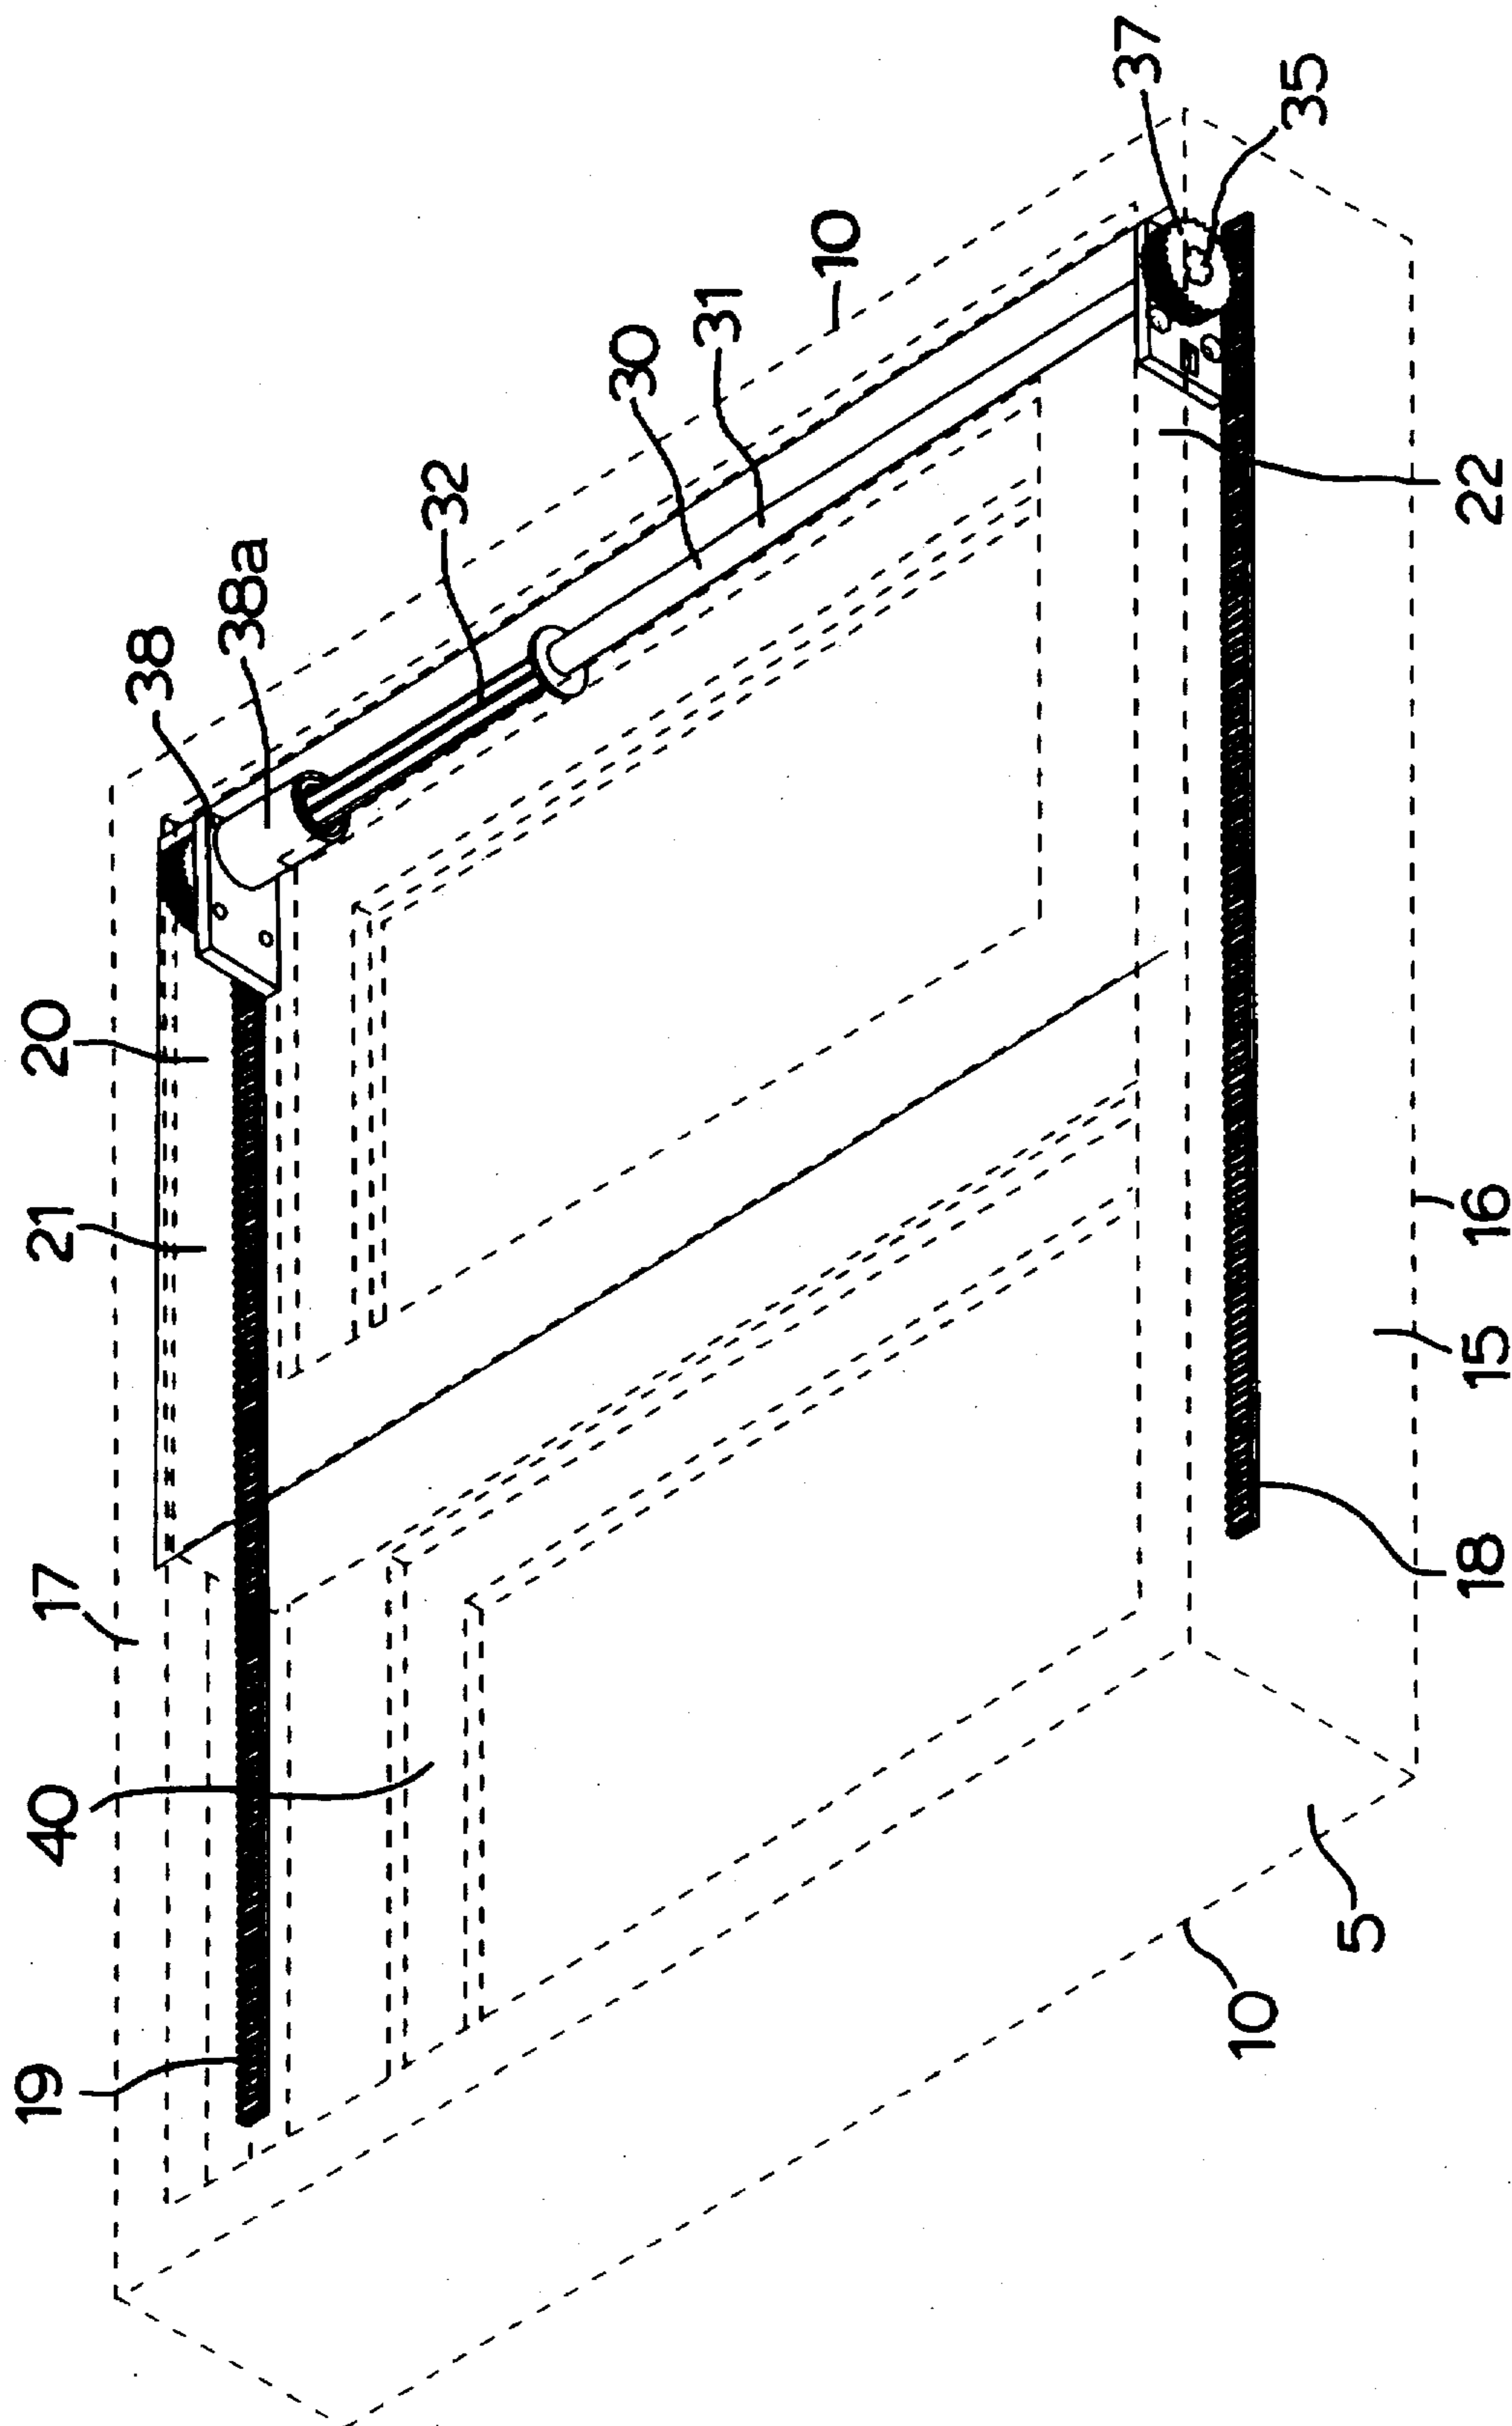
is a perspective view of a mechanical assembly 10. The assembly includes a base 5 and a top plate 19. A central shaft 30 is supported by bearings 31 and 32. A handle 20 is attached to the shaft via a coupling 38. A bracket 35 is mounted on the base 5, and a component 37 is visible near the handle. Various other parts are labeled with numbers 1 through 40.
